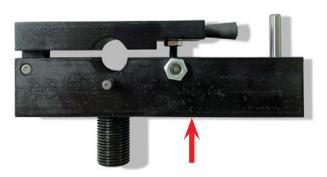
Bar Feeder Front-Mount Assembly (P/N 8826). The red arrow shows the offset location of the ball screw lathe threaded-adjustment rod (P/N 8827).
